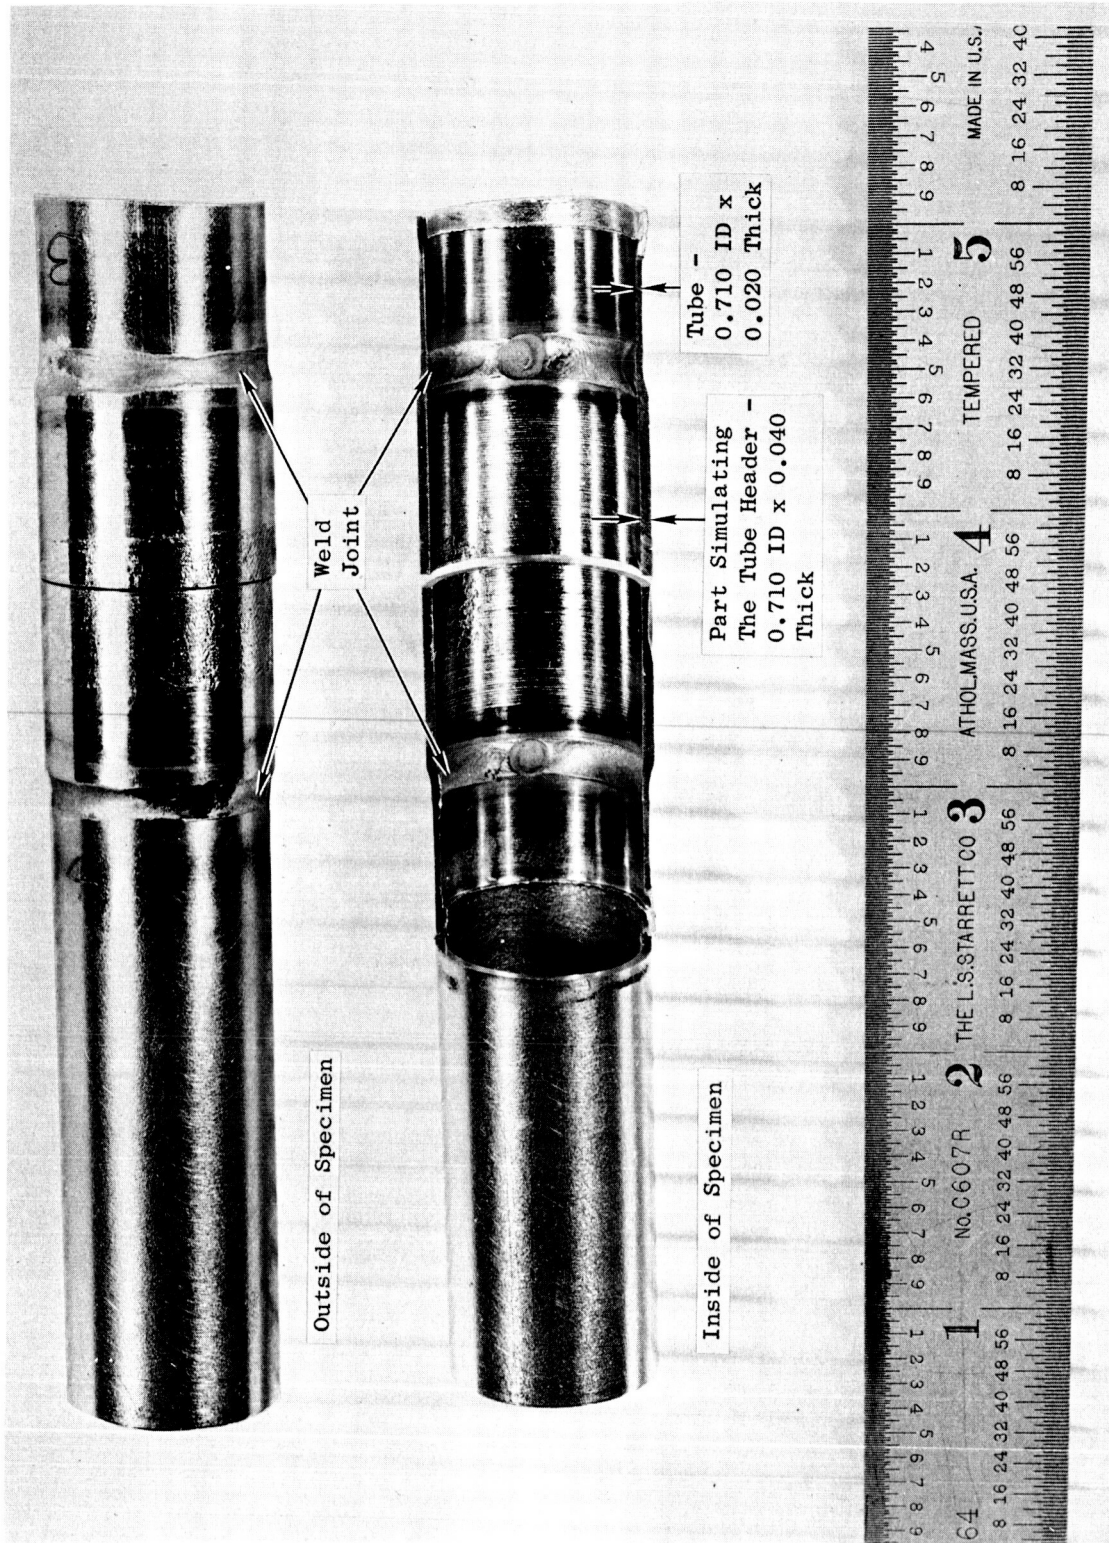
Specimen of Internal Tube to Header Weld with L-605 Material
